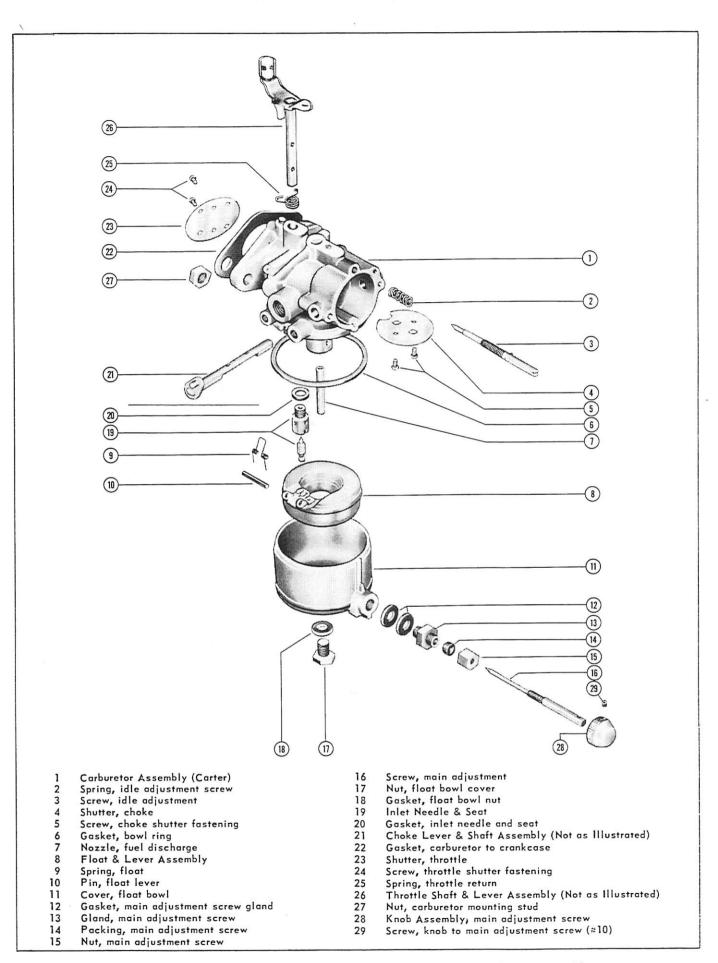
Pressure Feed Carburetor and Choke Assembly (Mark 20H-55H)
